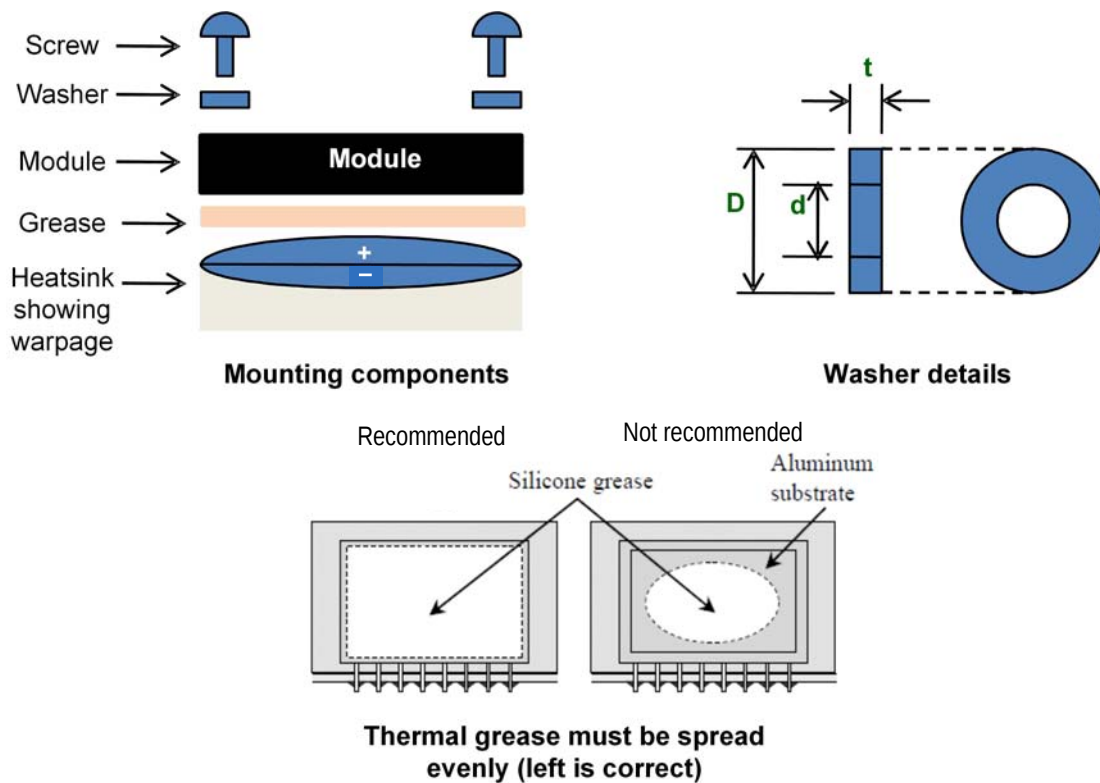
Module Mounting details: components; washer drawing; need for even spreading of thermal grease
